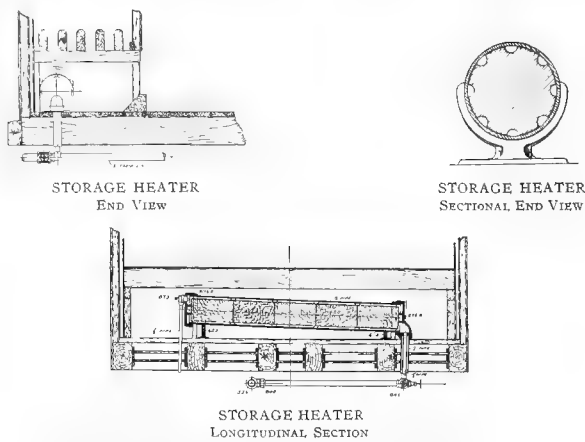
Gold's Improved Storage Heater for Use in Refrigerator Cars During Cold Weather. Gold Car Heating & Lighting Company.
